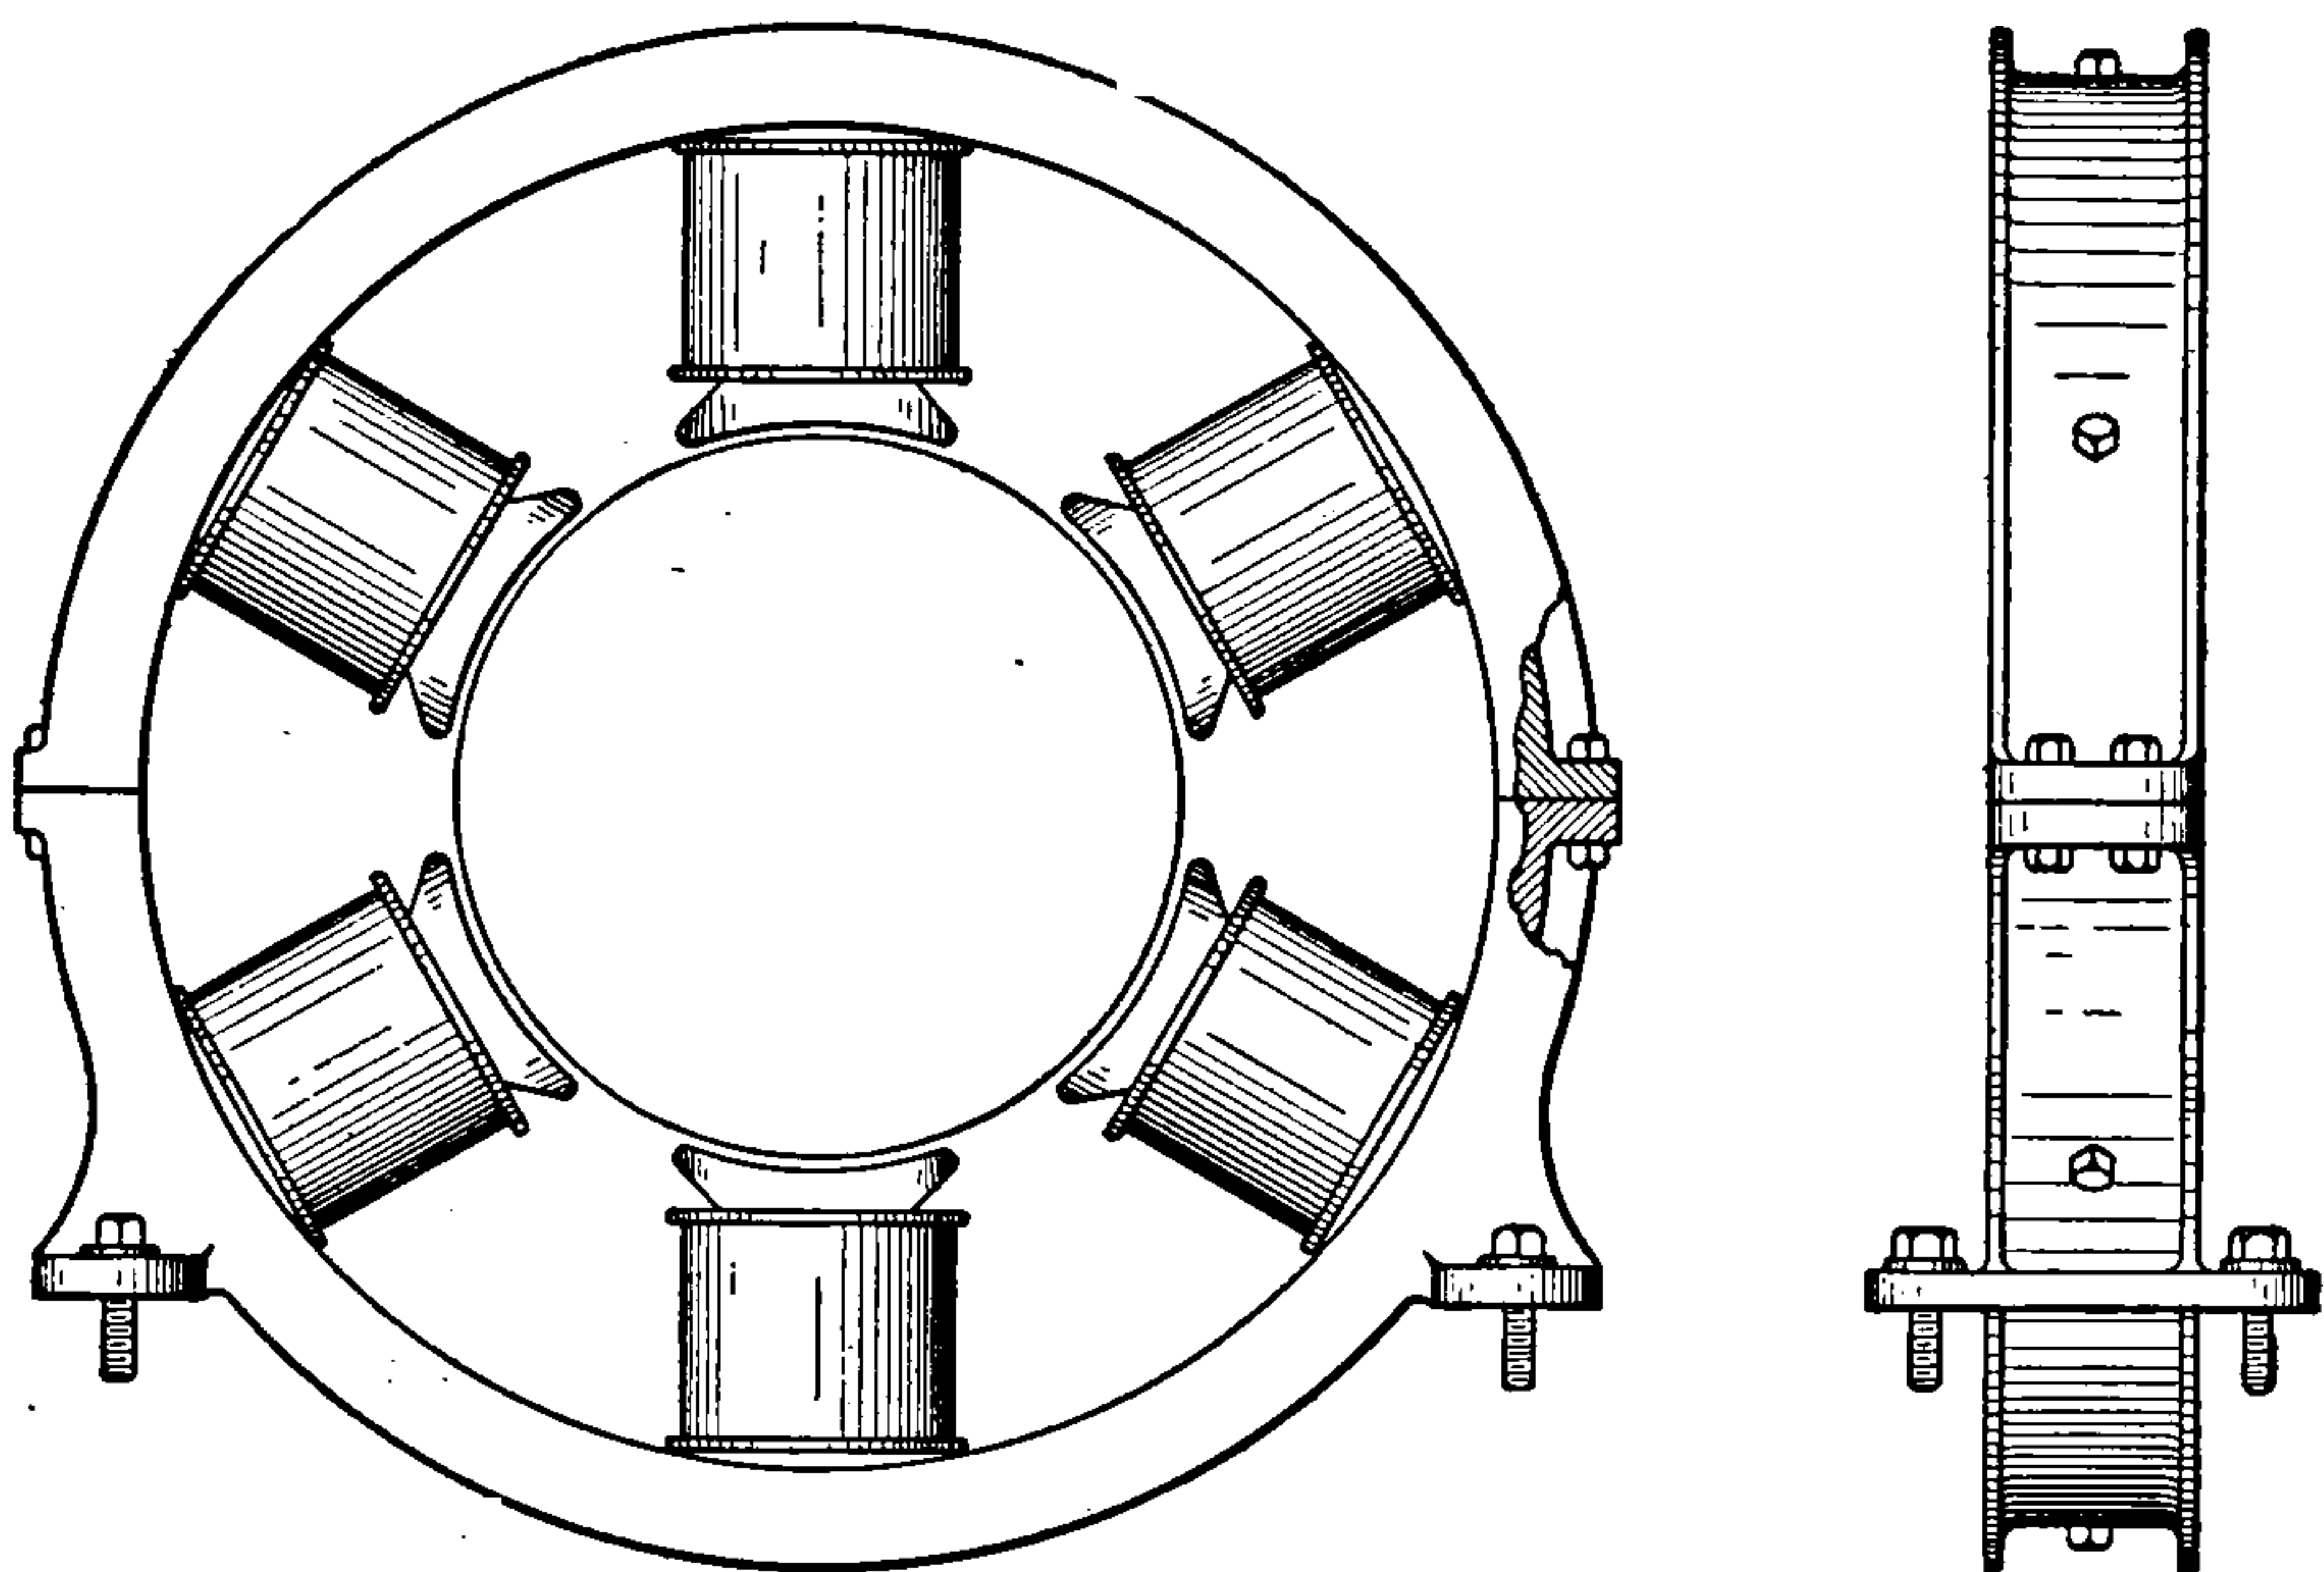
Magnet-Yoke with Parts Bolted Together at Sides of Rings
